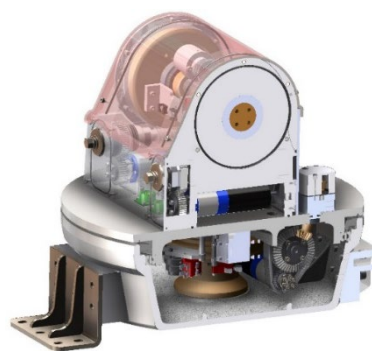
PDA-150-MIL Antenna Chasis Side Cut View (Bronze parts can be seen)
